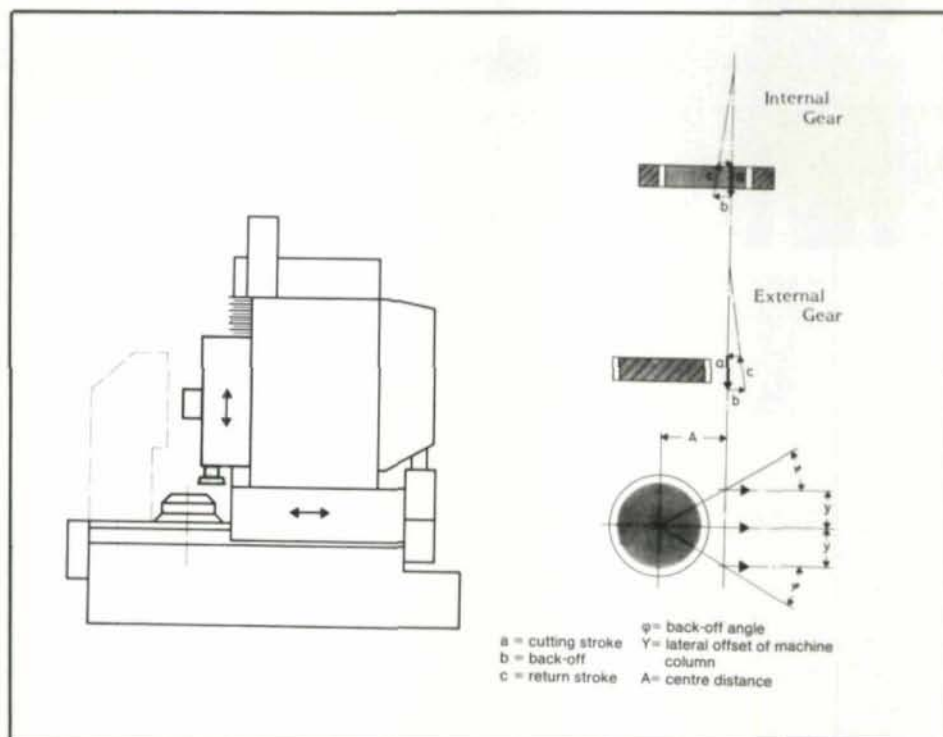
"Modern" Gear Shapers — Cutter Spindle Back-Off System
